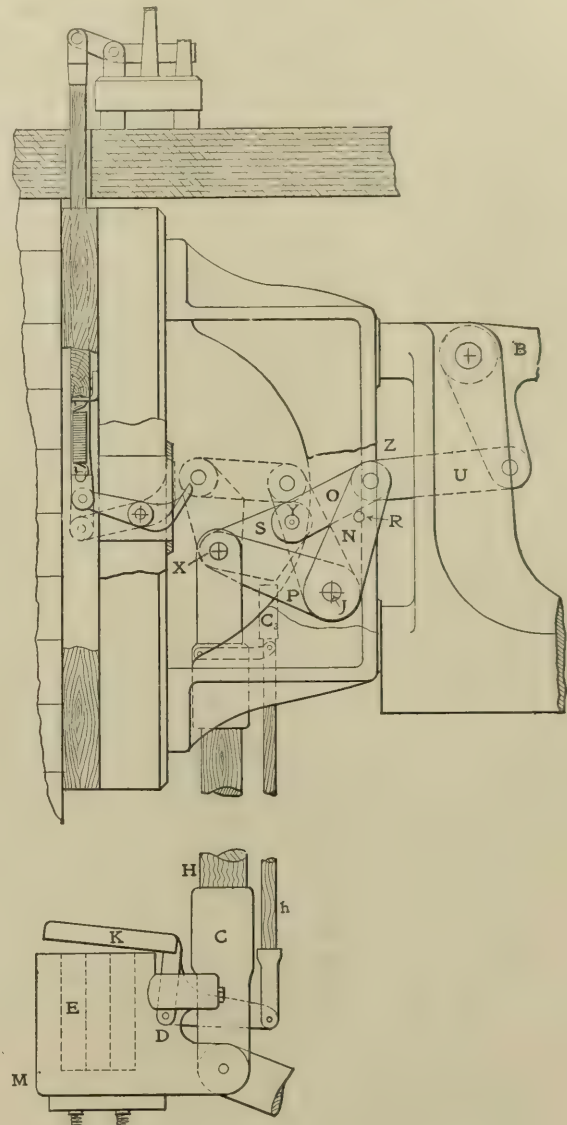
DETAIL OF TRIPPING MECHANISM.
